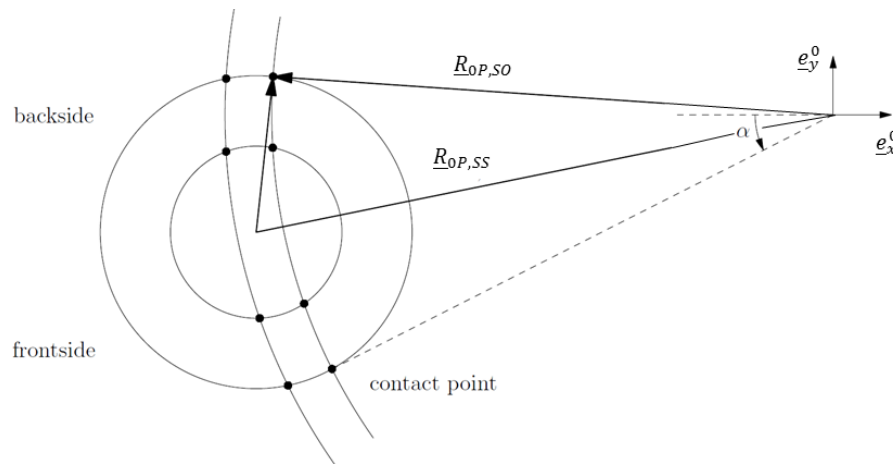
Kinematic situation for double-sided contact between the grinding wheel and workpiece with the connecting vectors.
